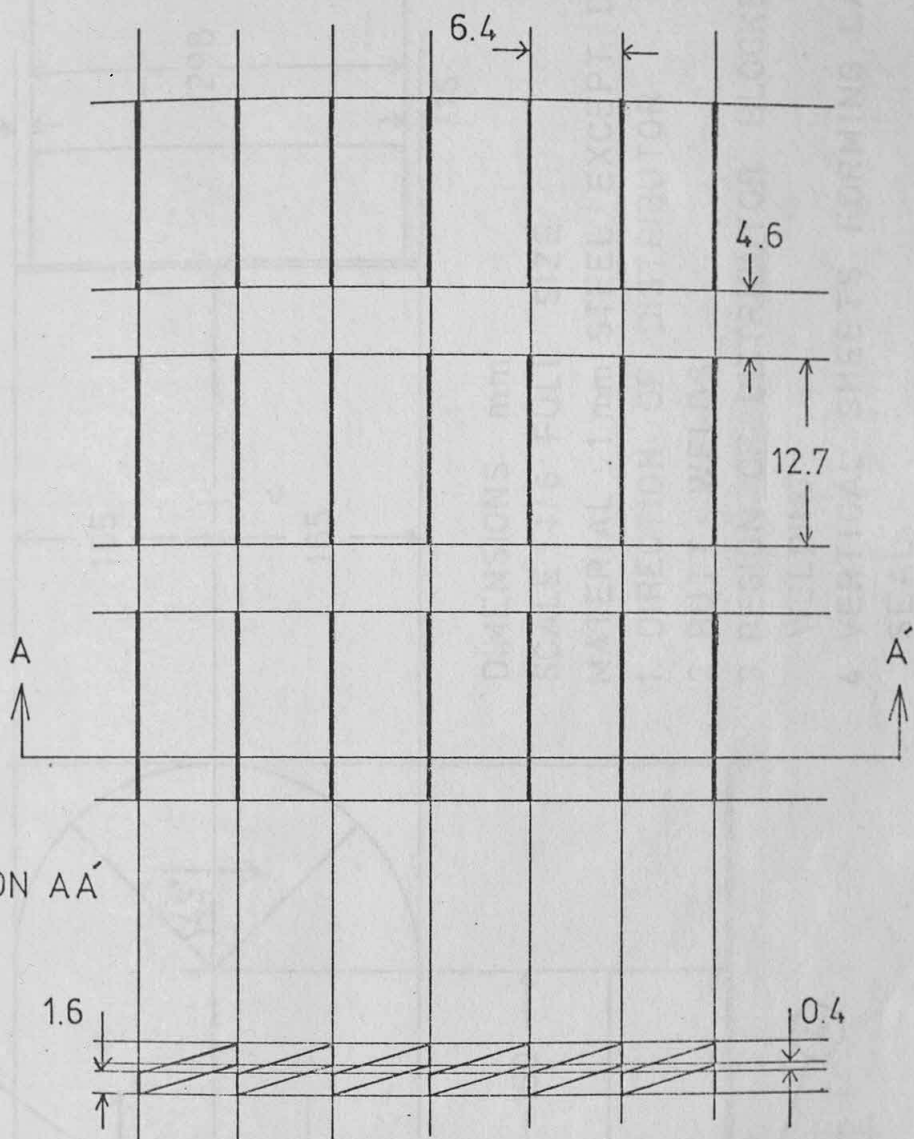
DISTRIBUTOR PLATE CRITICAL DIMENSIONS
